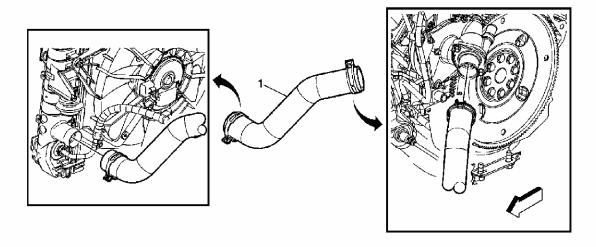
View Of Radiator Outlet Hose (LD8) Courtesy of GENERAL MOTORS CORP.
